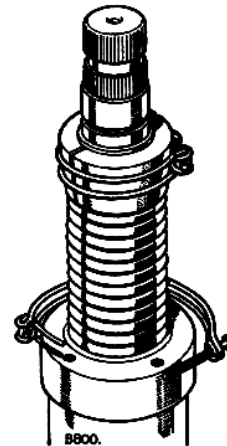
Replacing steering relay shaft and bushes in housing.
